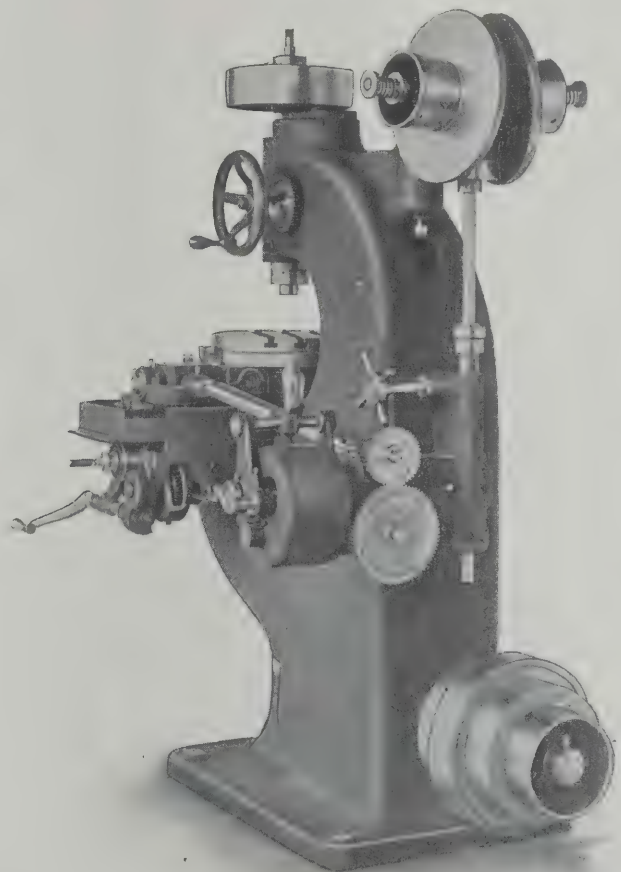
Rear View of Becker Milling Machine, showing Friction Feed
